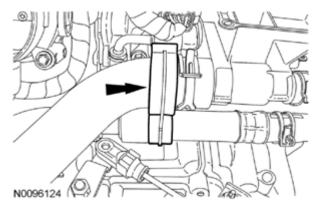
Locating Coolant Hose Retainer Courtesy of FORD MOTOR CO.
